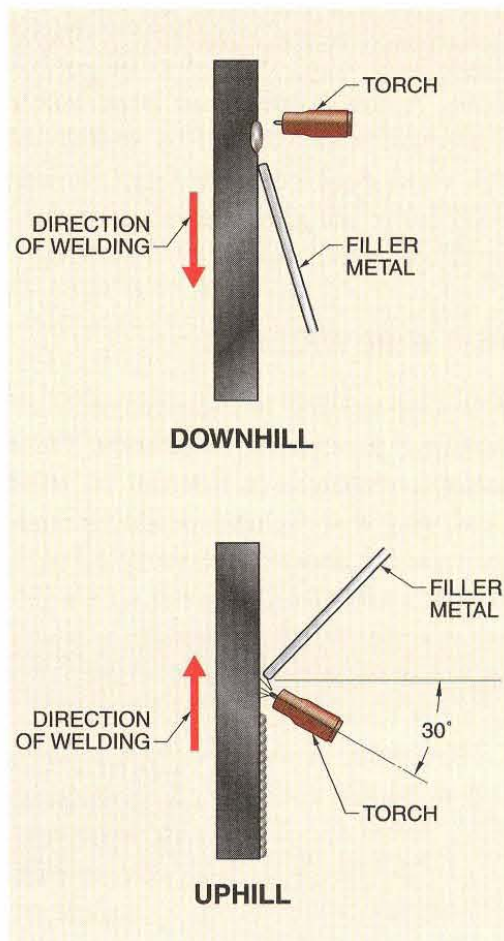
The proper angles must be maintained when performing downhill and uphill welding.
